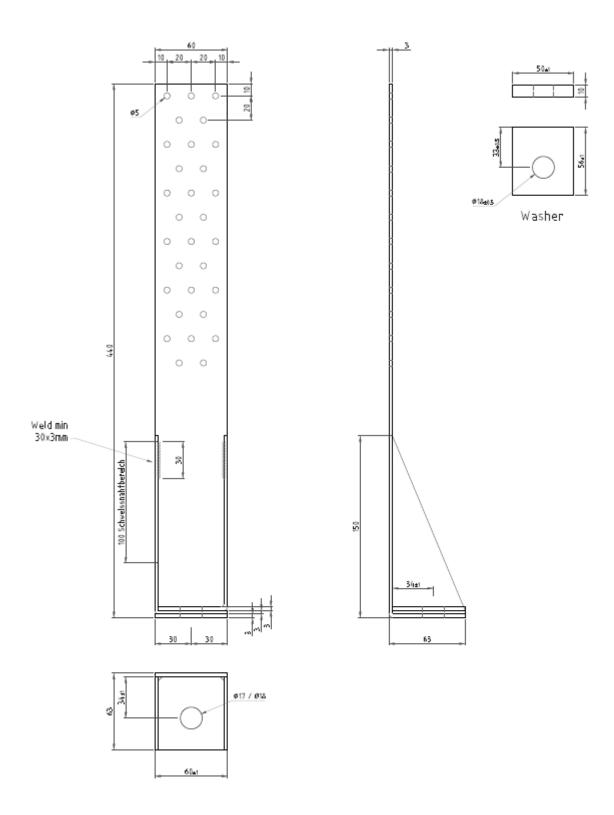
Dimensions of type WHT440 (drawing with washer 56x50x10)
